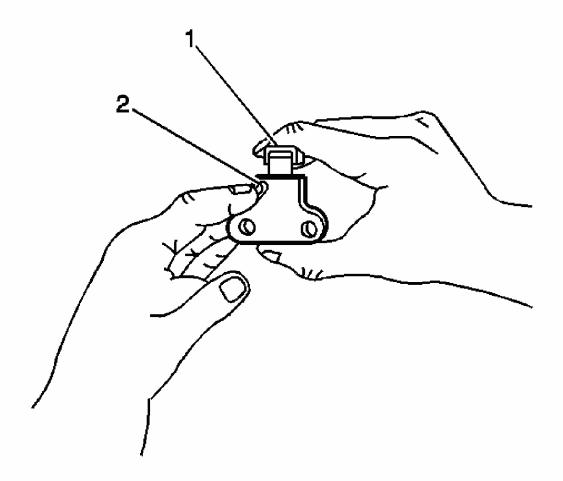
View Of Tensioner Shoe & Ratchet Lever Courtesy of GENERAL MOTORS CORP.
